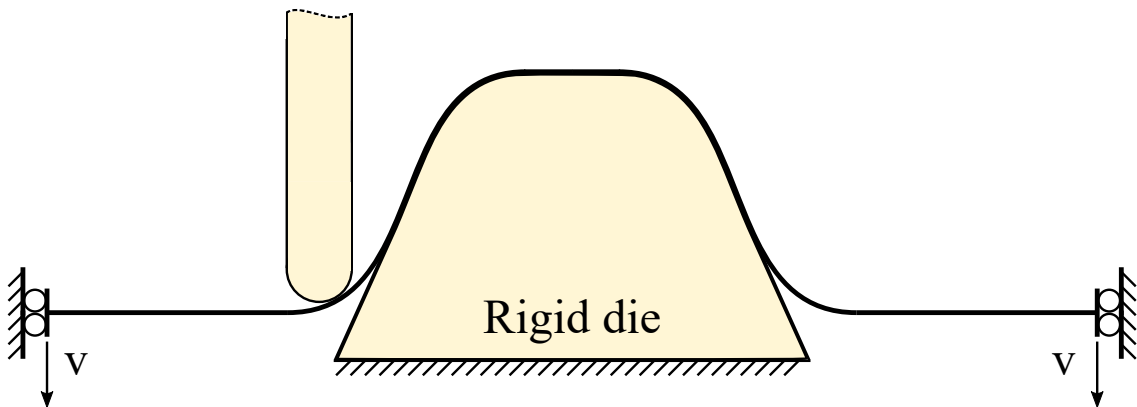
Two-point incremental forming (TPIF). In addition to the forming tool, a moving frame and a die are employed.
